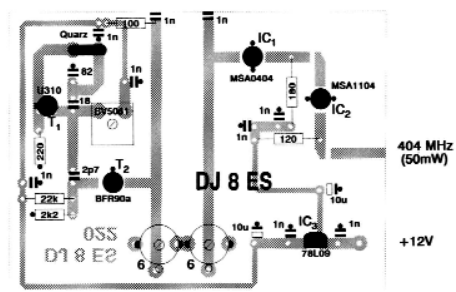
Component layout of the local oscillator used on the 70cm transverter showing the component side of the PCB.
